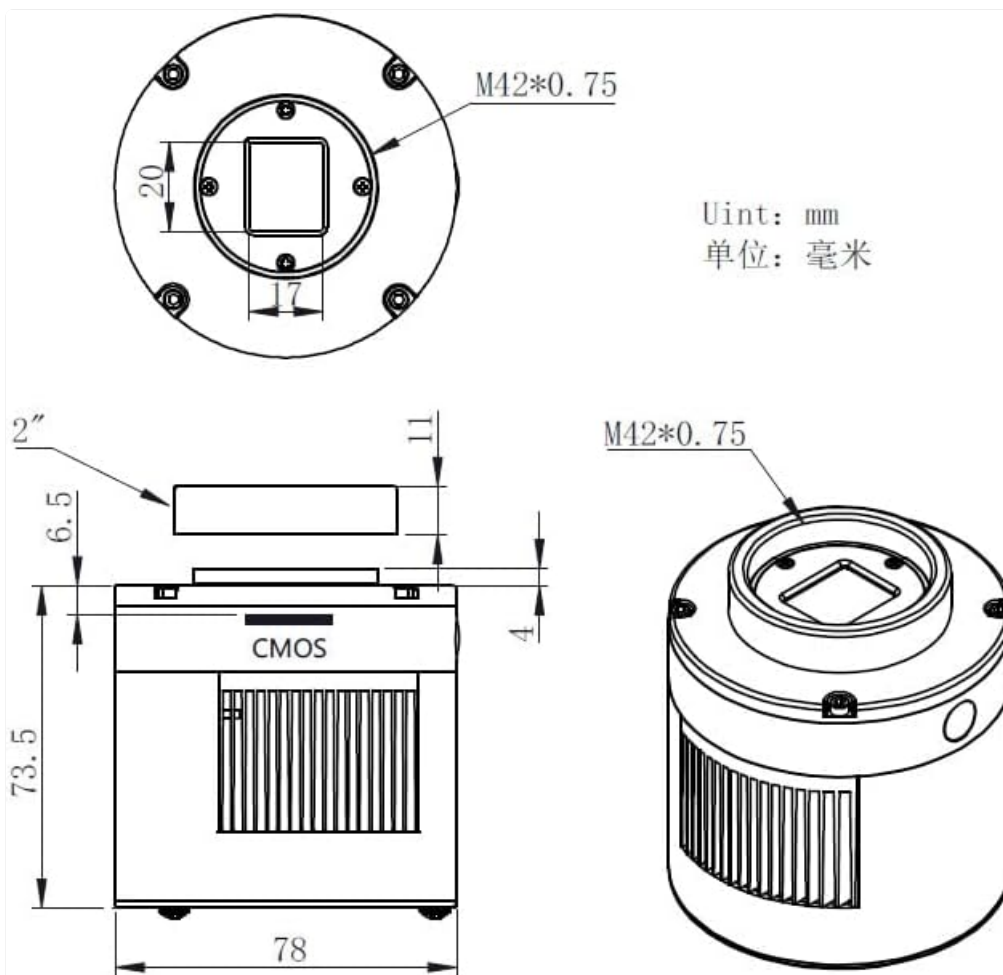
Technical drawing illustrating the dimensions and sensor placement of the ZWO ASI533MC-P camera. All units are in millimeters.
